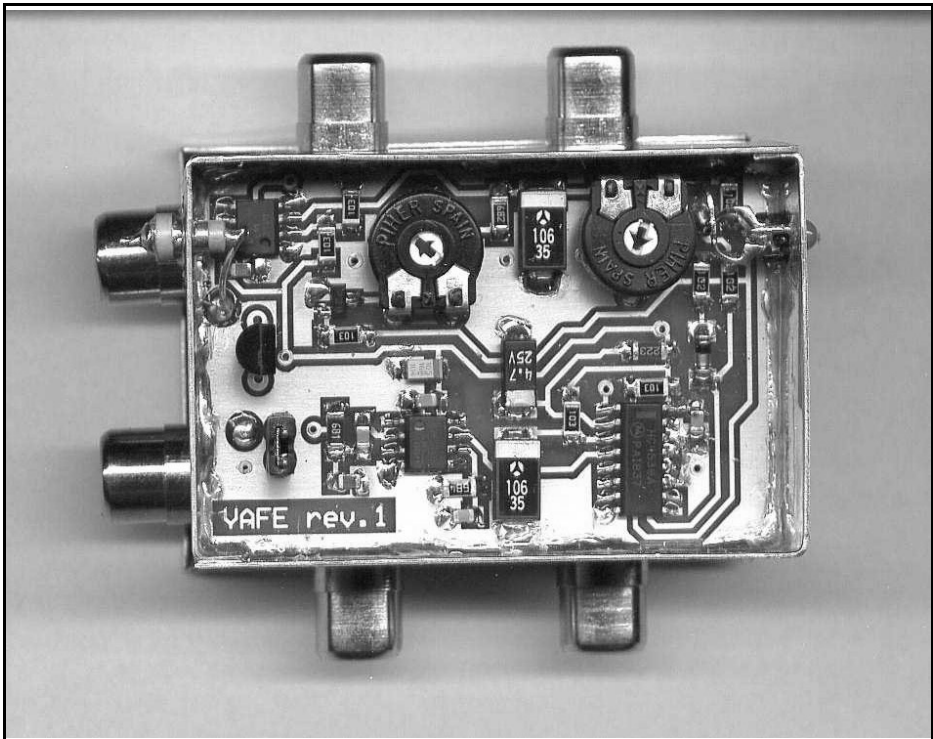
The completely assembled topside of the ATV squelch, already fitted into a tinplate housing with jacks.
